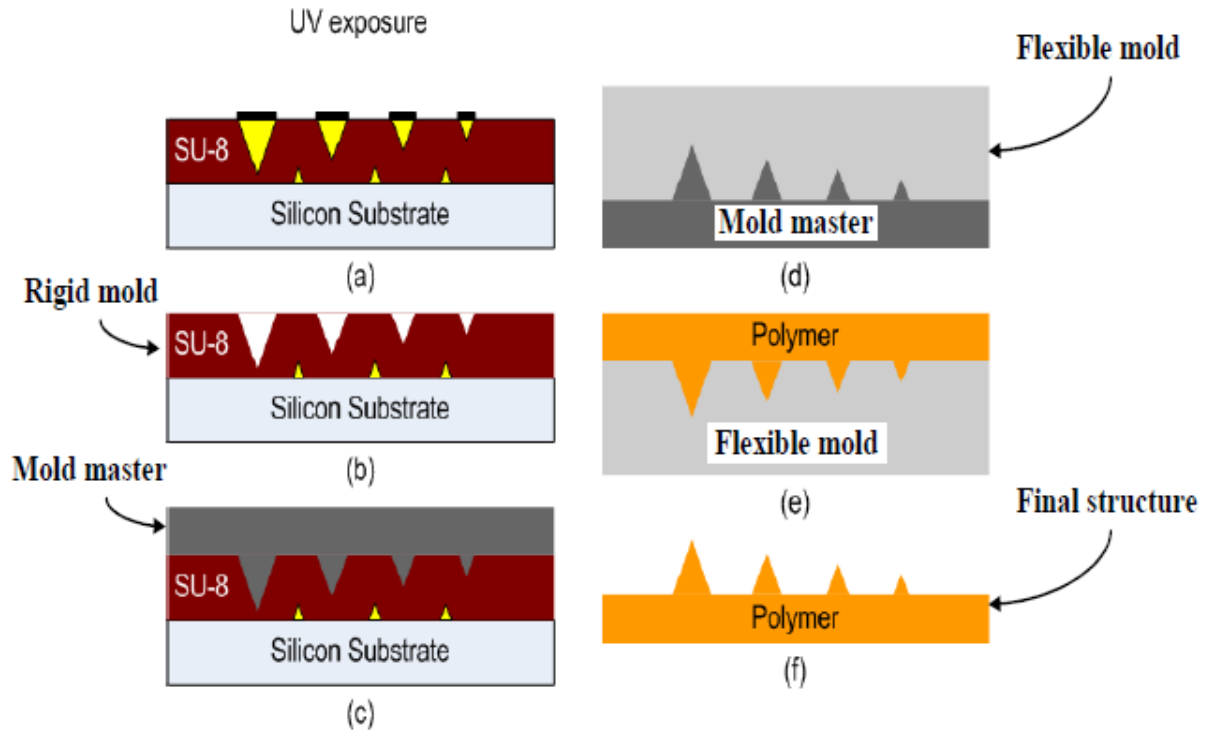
Micromolding process shows how a mold is created in (b) which is used to create a mold master in (c). This mold master is used to create flexible molds (d) which are used to shape polymers into your desired structures (f) [12].
